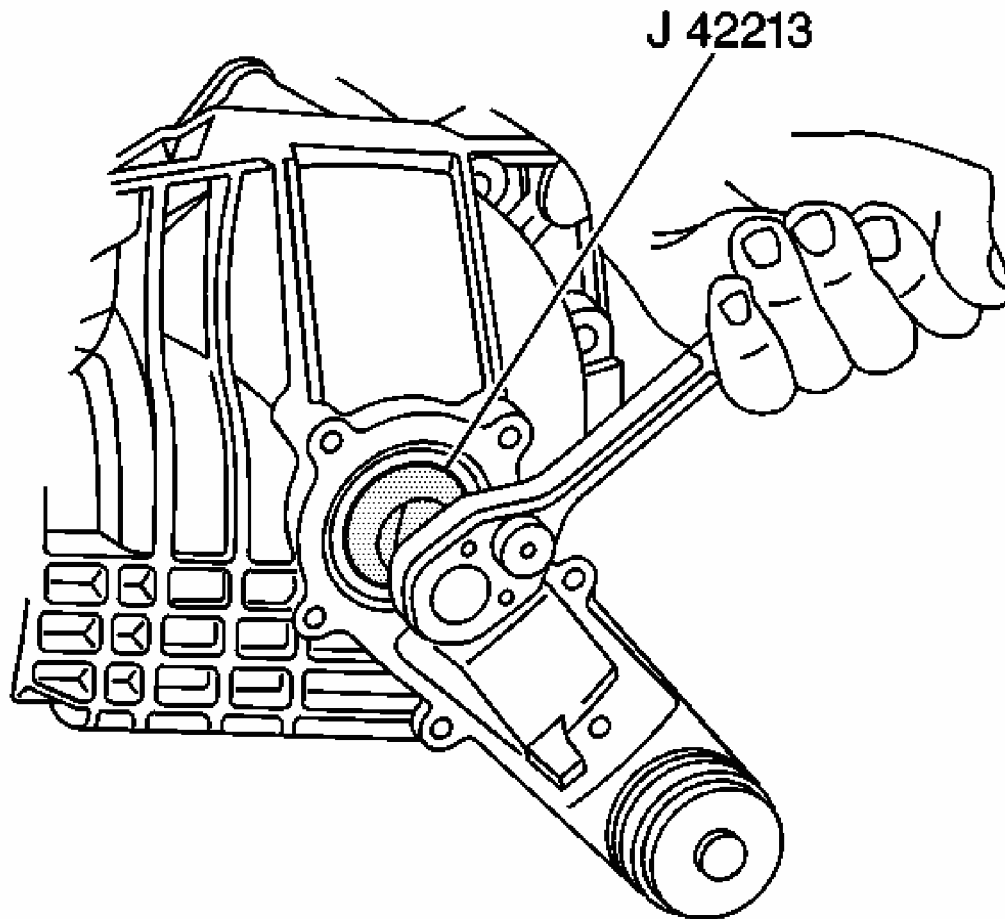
Removing Left Differential Bearing Adjuster & Differential Case Bearing Cup
